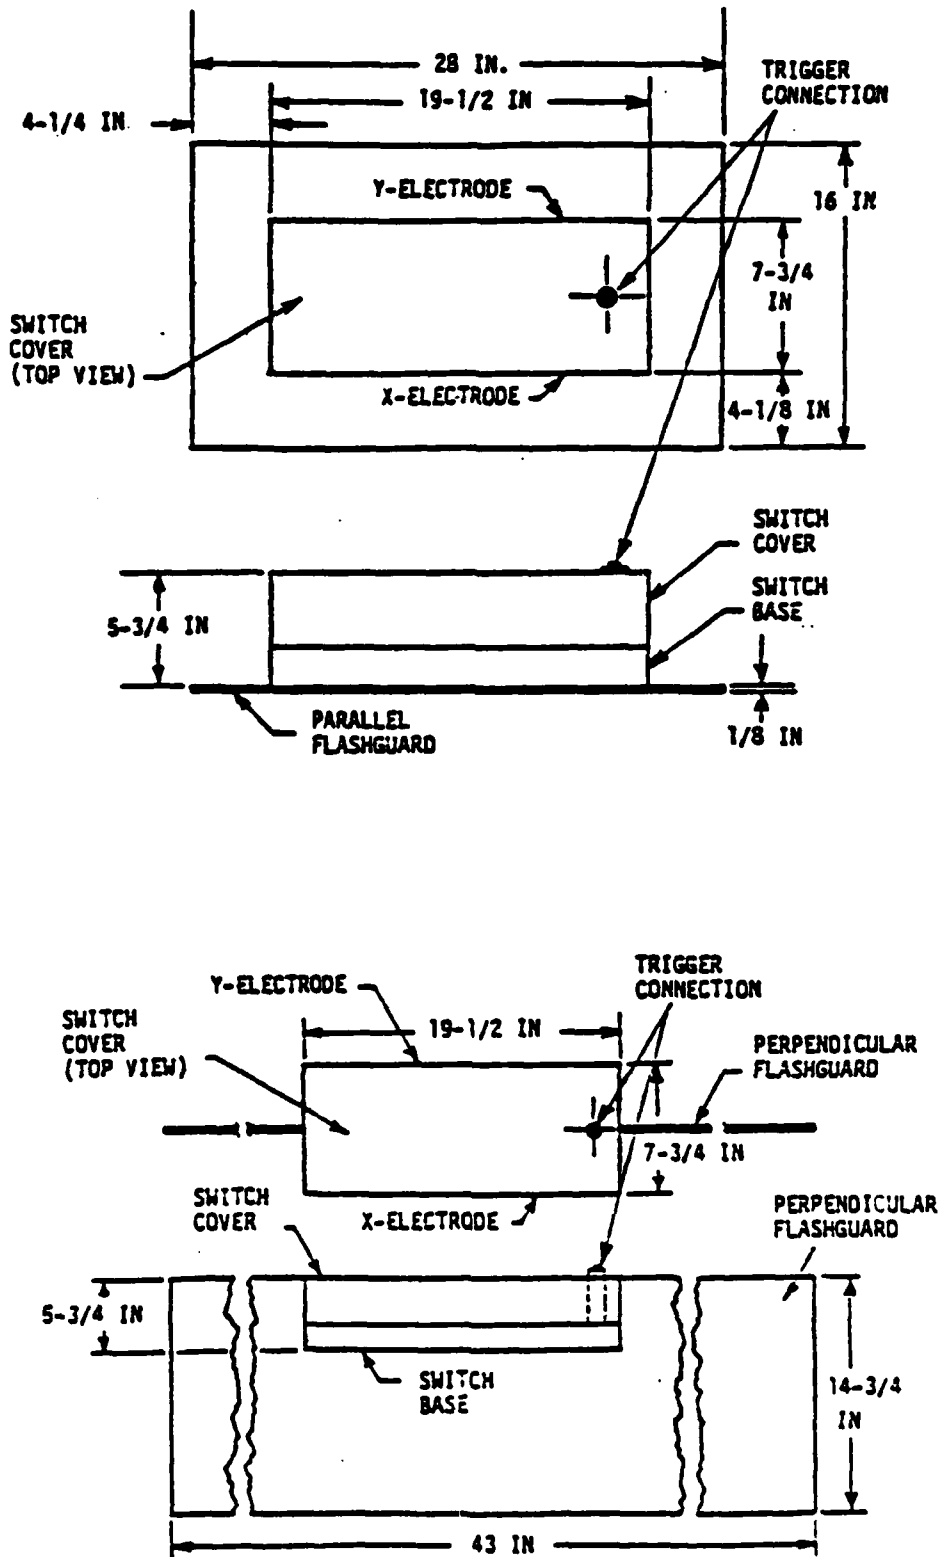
Rail-Gap Flashguard Arrangements. (Courtesy of Maxwell Laboratory).
